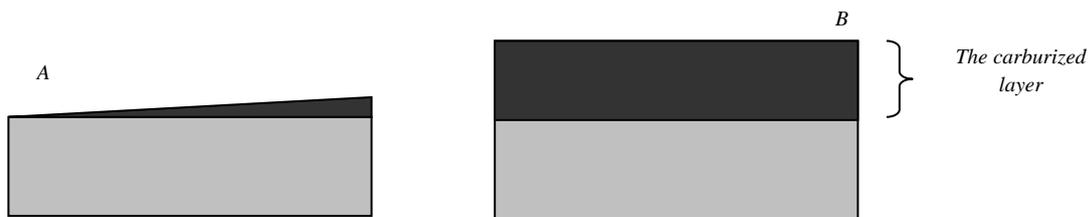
the omitting of the carburized layer in cylindrically machining A) after machining, B) before machining
